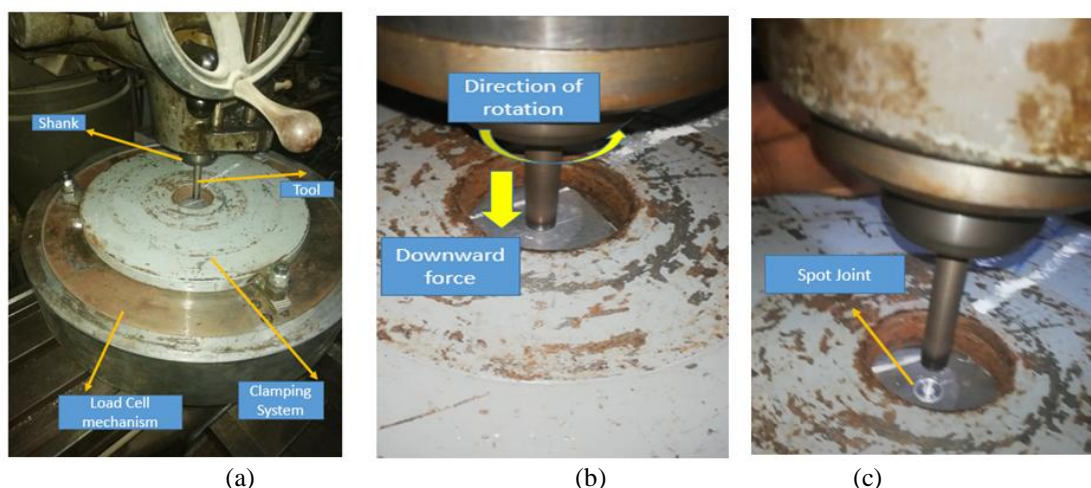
The main steps of FSSW process (a) fixation for specimen and load cell, (b) rotation of spindle and welding in process, and (c) welding is done.
